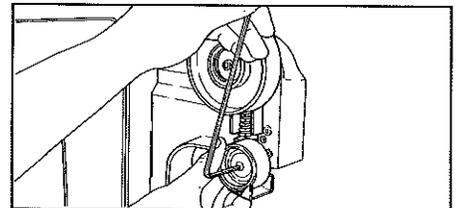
Install the wheel guard and the left idler wheel below the tracking wheel.
